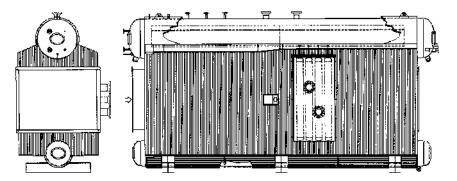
A gas-fired O-type package boiler with extended surfaces. (Courtesy of ABCO Industries, Abilene, TX.)
